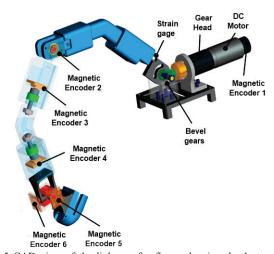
CAD view of the linkage of a finger showing the 1 st revolute joint actuated by the DC motor and the 5 passive and the joints with their position encoders.
